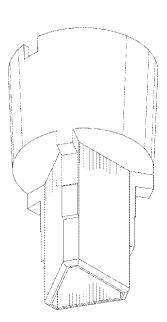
is a right side view in elevation the fluid transfer device showing the new design;
